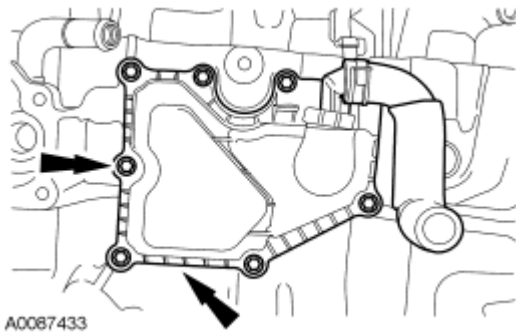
Locating Crankcase Vent Oil Separator And Bolts
